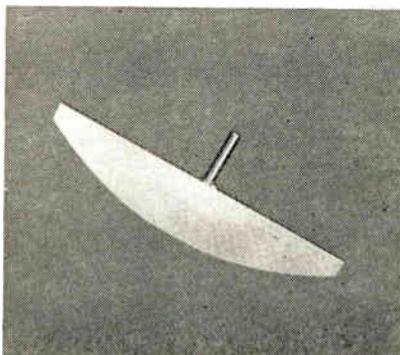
Para-Shaper tool. Cutting edge is fluted with a 15° rake angle.
